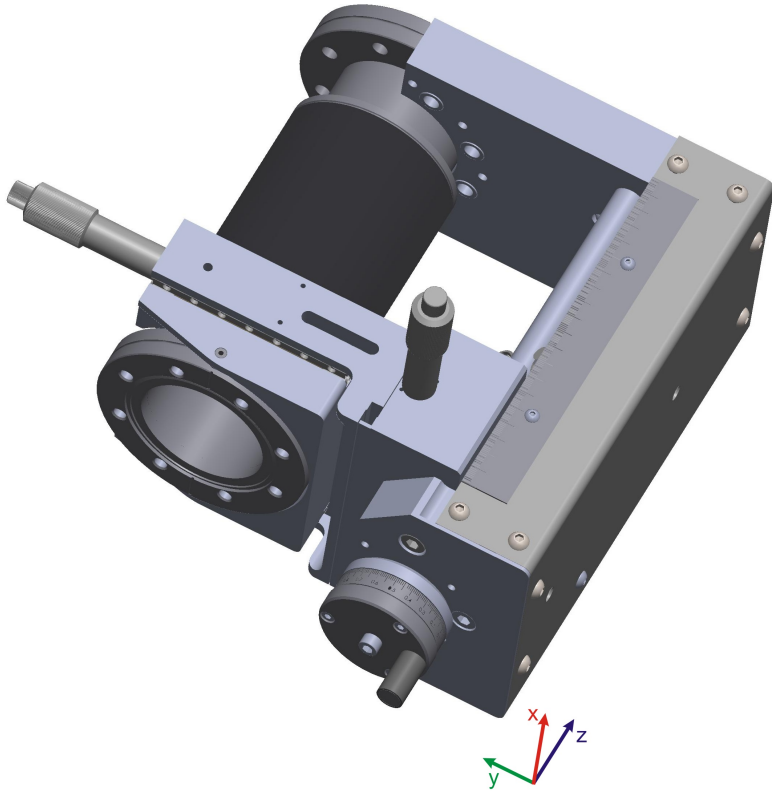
3D sketch XYZ stage XYZT64-50-H from the company UHV DESIGN. (3D CAD model provided by UHV Design)
